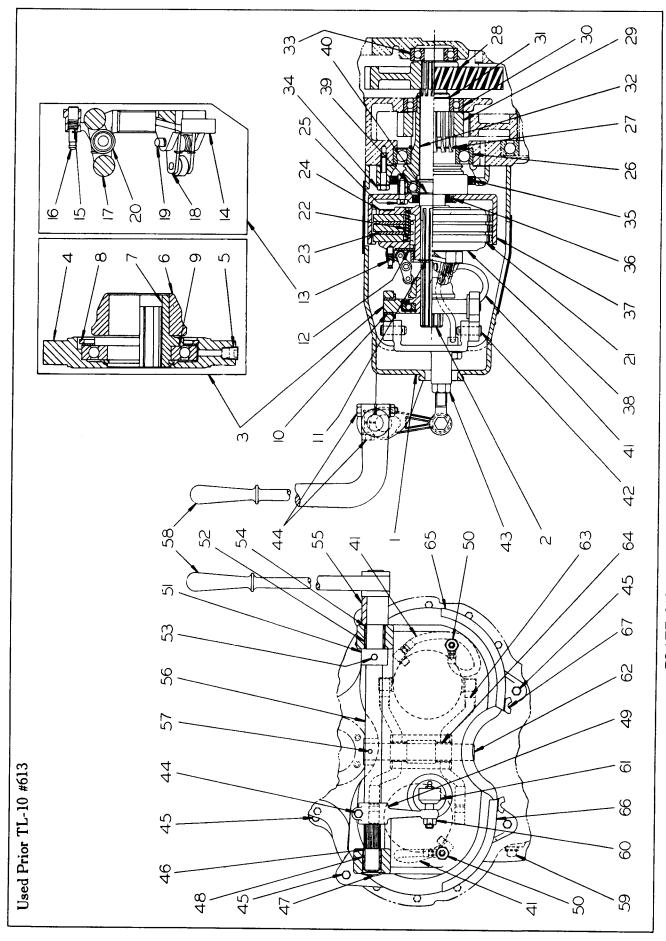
FORWARD AND REVERSE CLUTCH GROUP
